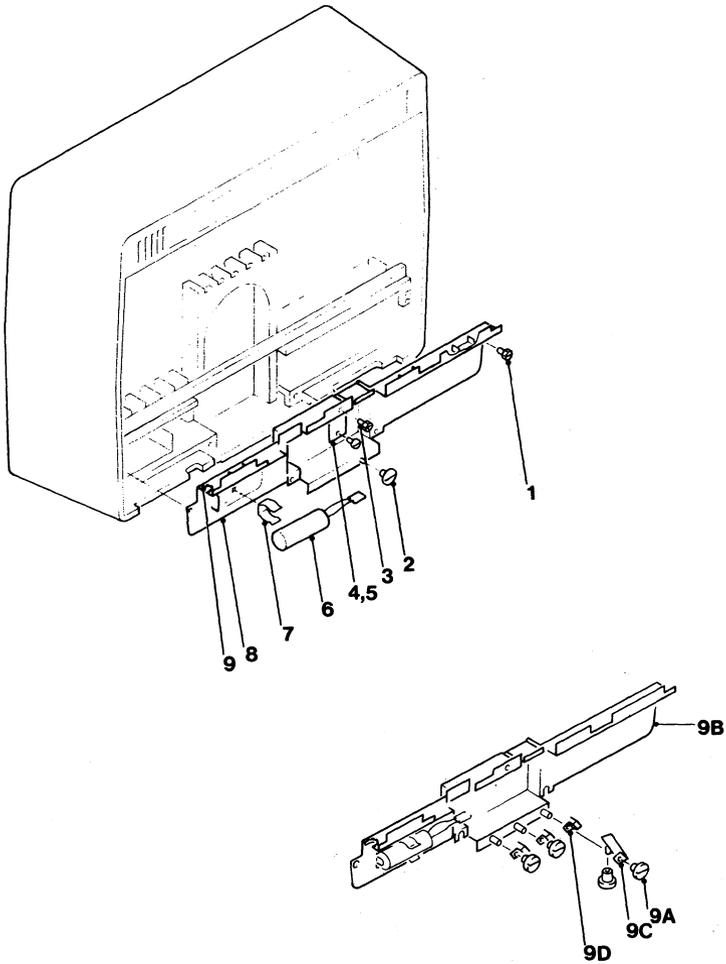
(Sheet 1 of 4). Rear Enclosure Assembly
